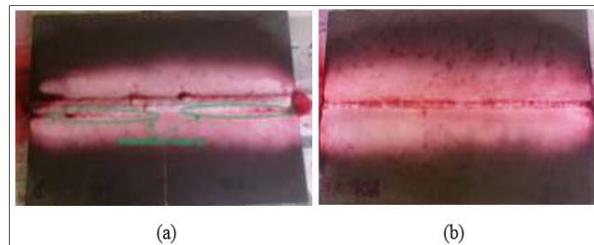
The porosity occurs on the weld face (a) and weld root (b) for CO₂ sample.
